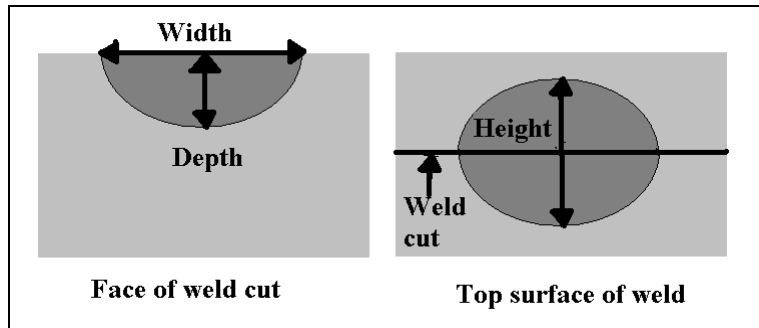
Terminology used to describe the size of the weld samples.
